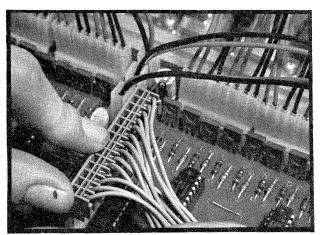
Connect Cable #7 to J1 on the Middle Driver Board.
